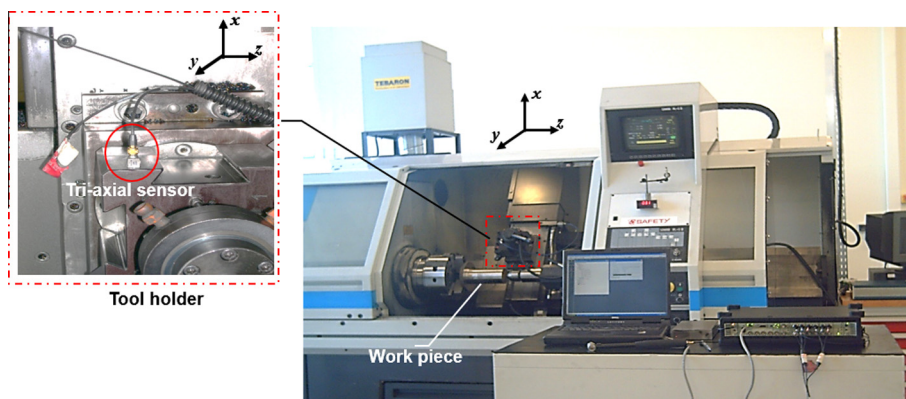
CNC lathe with data acquisition system and a tri-axial accelerometer located on the tool holder.
